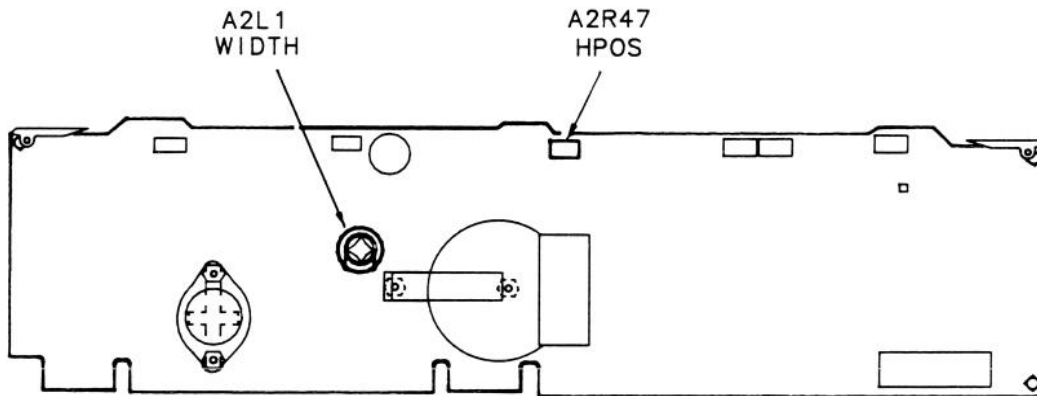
Horizontal Width and Horizontal Position Adjustment Locations
